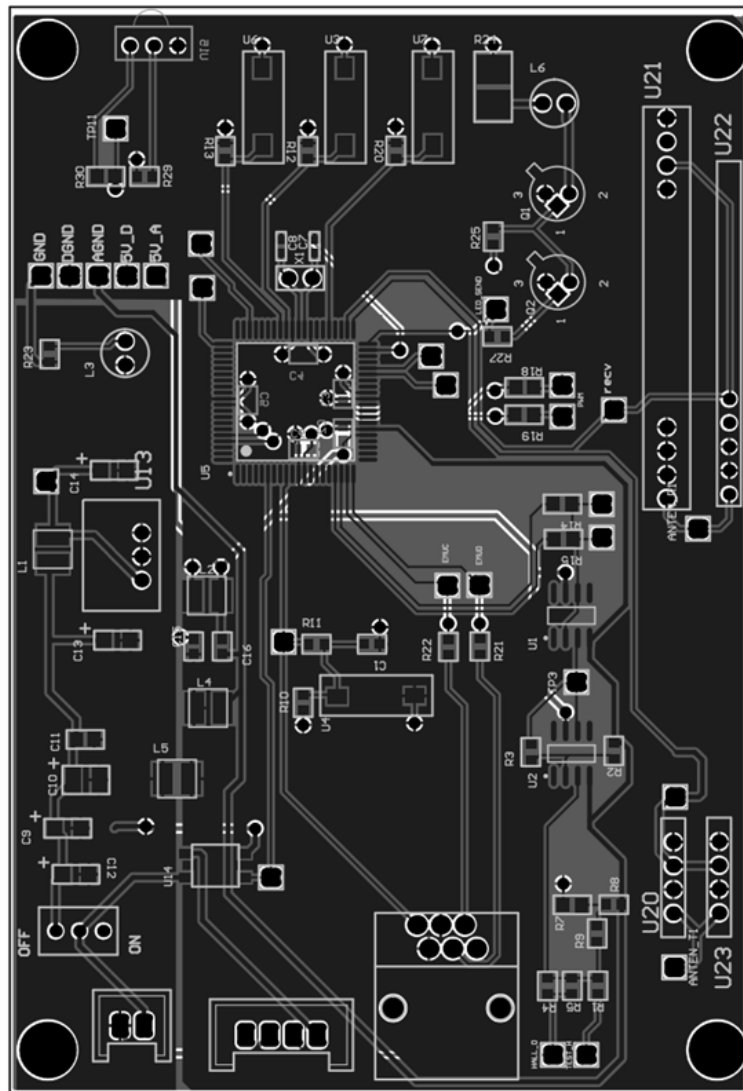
PCB LAYOUT of DATA-ACQUISITION CARD
